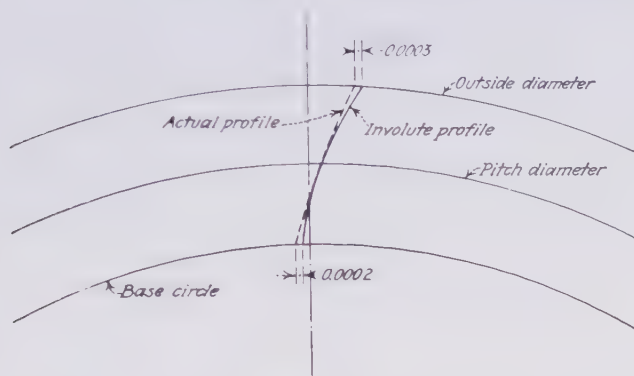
Error on cutting edge of a pinion-shaped cutter.
